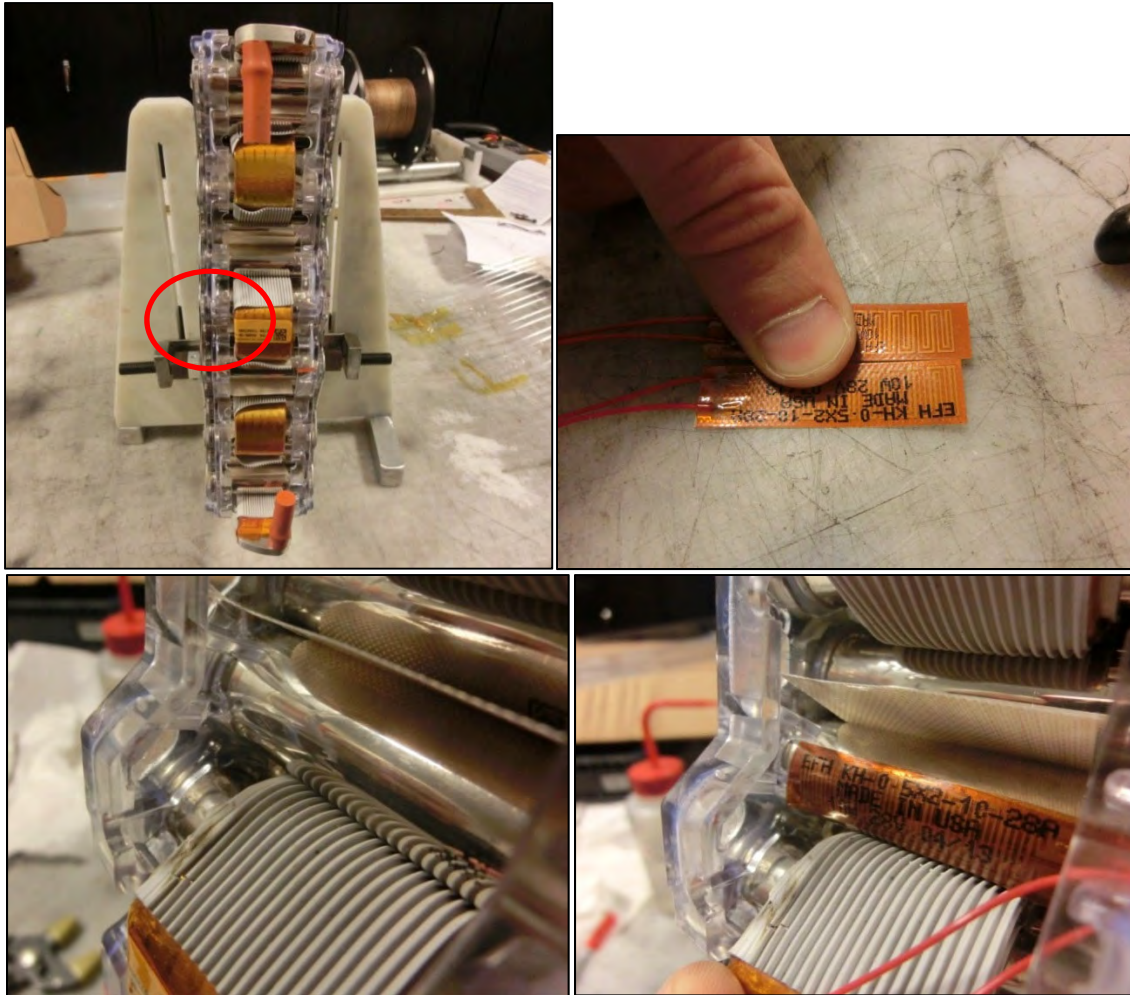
Top left: the module on end. Top right: the 0.5" x 2" heater, trimmed slightly to fit the module. Bottom left: a plastic rib trimmed to allow access for heater installation. Bottom right: the heater installed.
